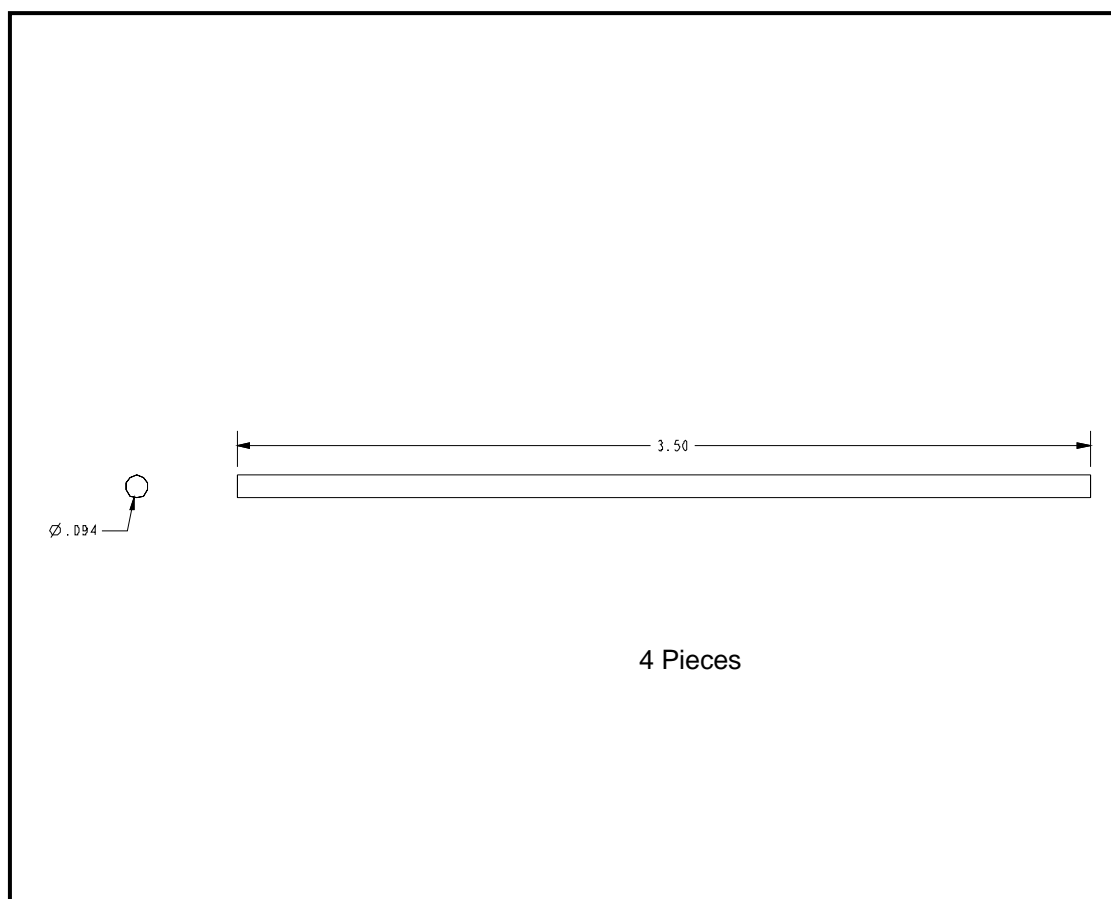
CAD Drawing of the Standard JSR Mold – Exhaust Hole Rods (Material: Aluminum, Filename: standardexhaustrod.drw).
